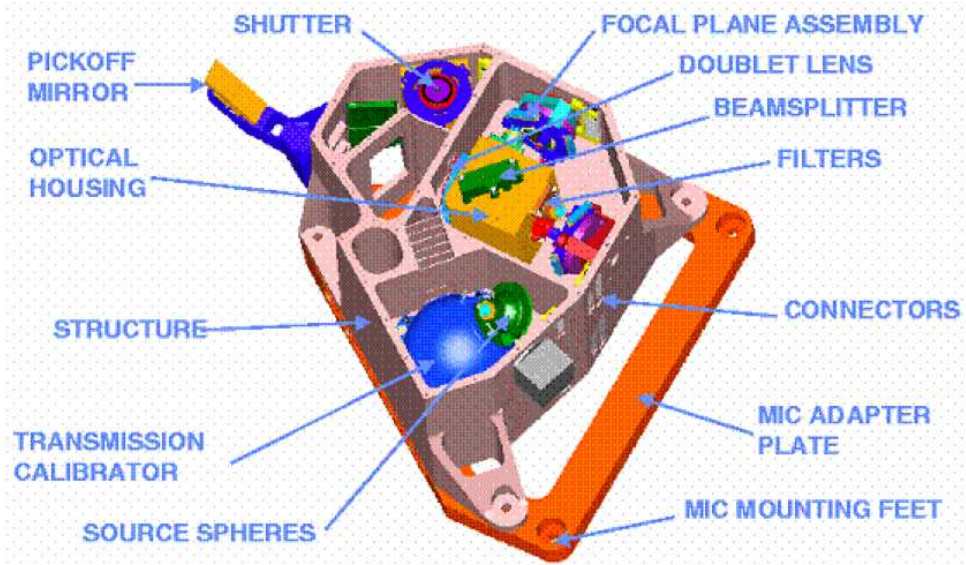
The IRAC cryogenic assembly model, with the top cover removed to show the inner components. Taken from IRAC Chapter 6 of the SOM.
